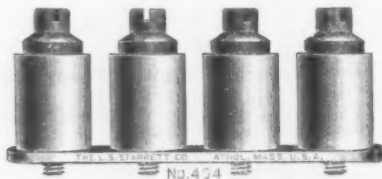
Toolmakers' Buttons with Screws and Washers for Jig Work.
